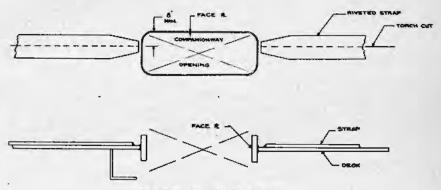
Arrangement of deck strap where it falls in line with companionway.
